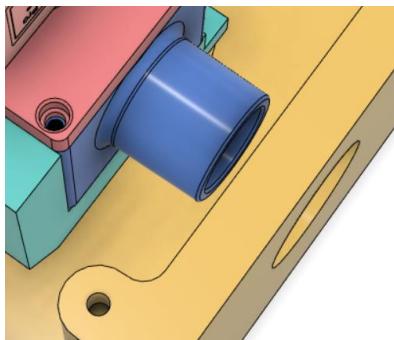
Before press-fitting the Oxy Nozzle Body with the Oxy Nozzle Holder
